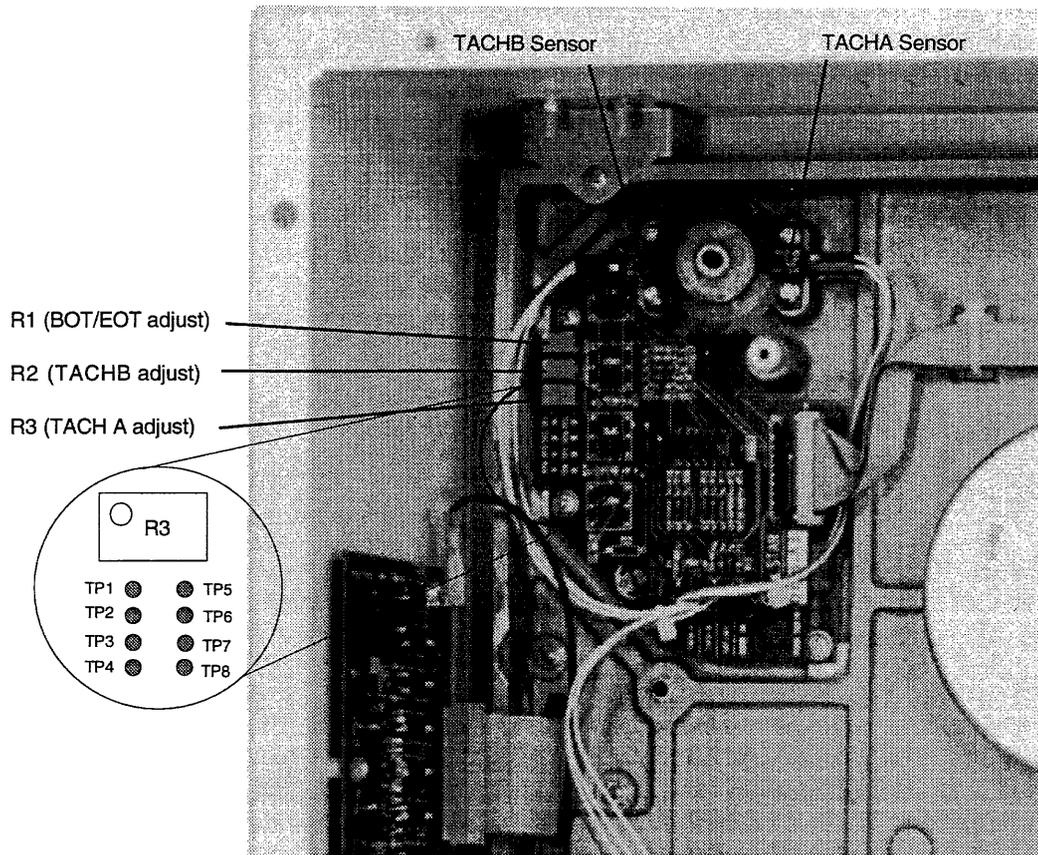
Switch PCBA and Tachometer Sensor Locations
